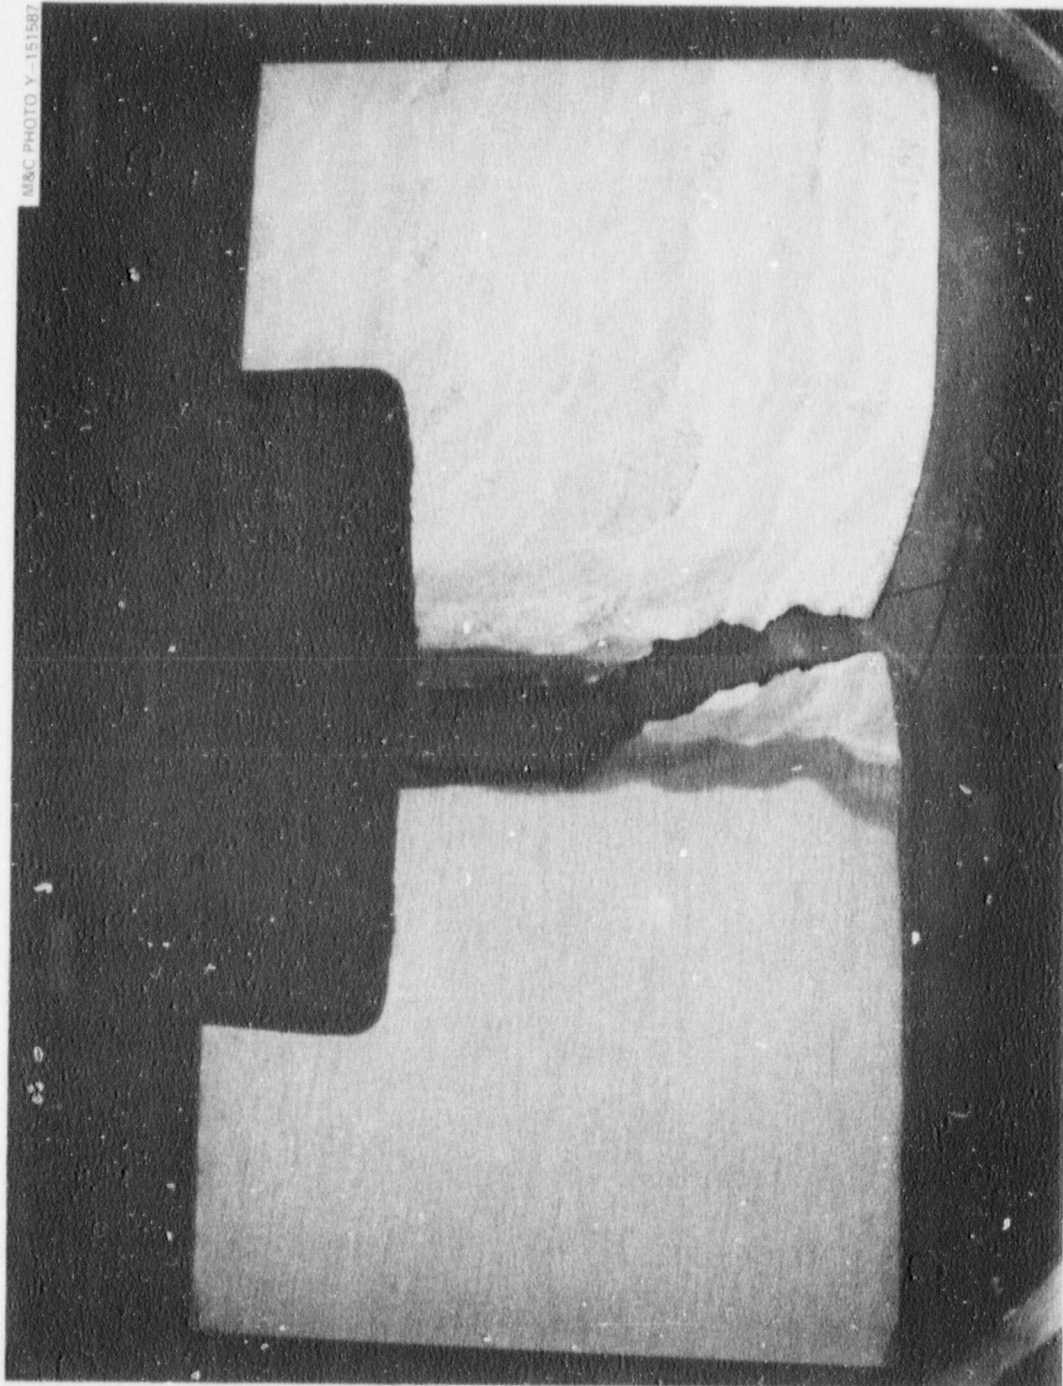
Face K_f (the face of slab K nearest the flange end of the vessel) of cross section of V-7B fracture.
